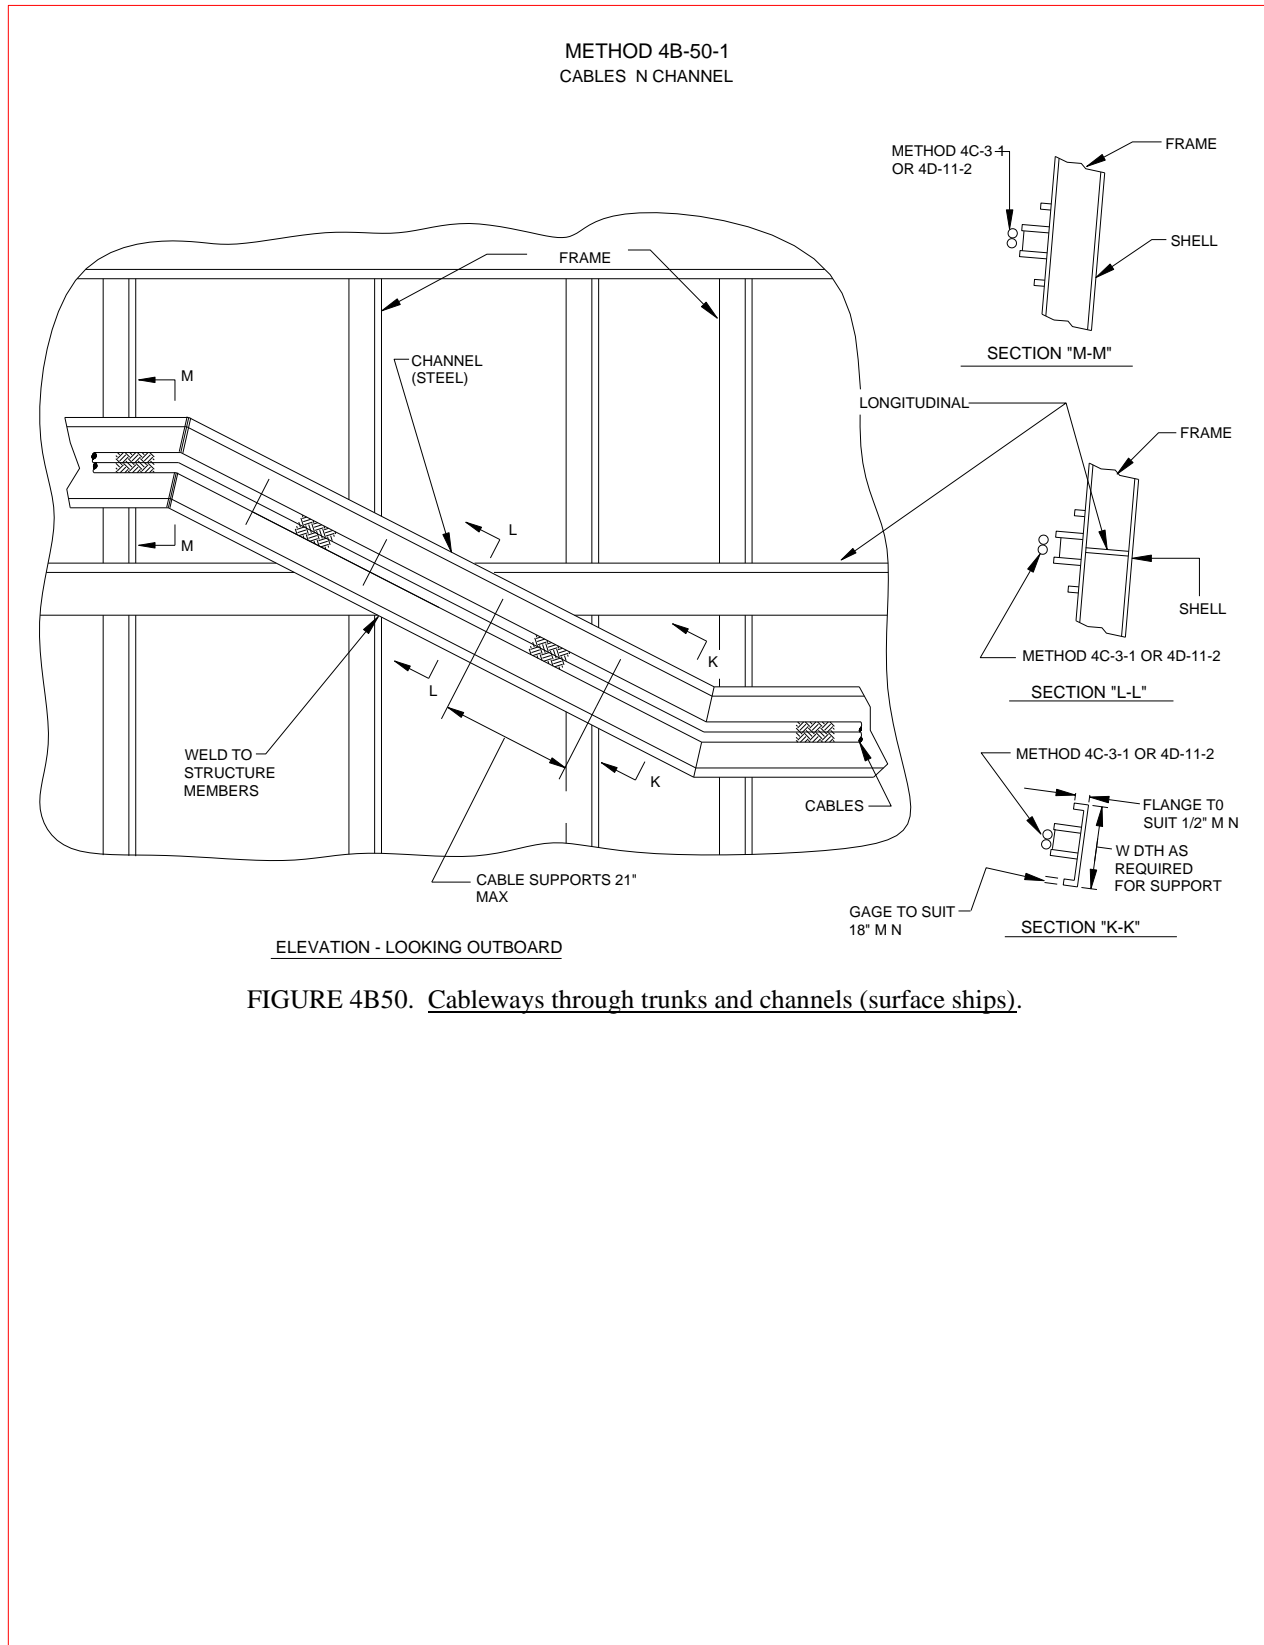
B50. Cableways through trunks and channels (surface ships).
